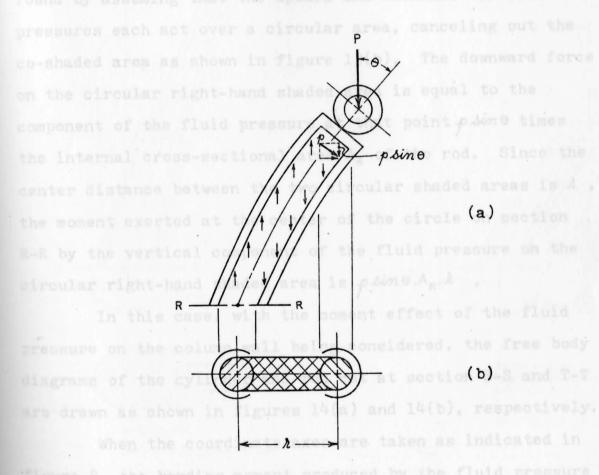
Rod Portion of Hydraulic Cylinder in Deflected Position. In the hollow rod section of the cylinder, as shown by the drawing in figure 13, the horizontal component of the fluid pressure balances itself out and is not shown. However, the vertical component of the fluid pressure, as shown in the hollow section, figure 13, produces a bending moment. Figure 13(b) shows the projection on the horizontal plane of the chosen cross-section R-R, of the areas upon which the vertical component of the fluid pressure acts. The vertical force is seen to be upward in the left-hand shaded area. The moment of the vertical force system is easily found by assuming that the upward and downward vertical pressures each act over a circular area, canceling out the co-shaded area as shown in figure 13(b). The downward force on the circular right-hand shaded area is equal to the component of the fluid pressure at that point $p \sin \theta$ times the internal cross-sectional area A_{R} of the rod. Since the center distance between the two circular shaded areas is λ , the moment exerted at the center of the circle on section R-R by the vertical component of the fluid pressure on the circular right-hand shaded area is $psin\theta.A_{R}$. λ .
